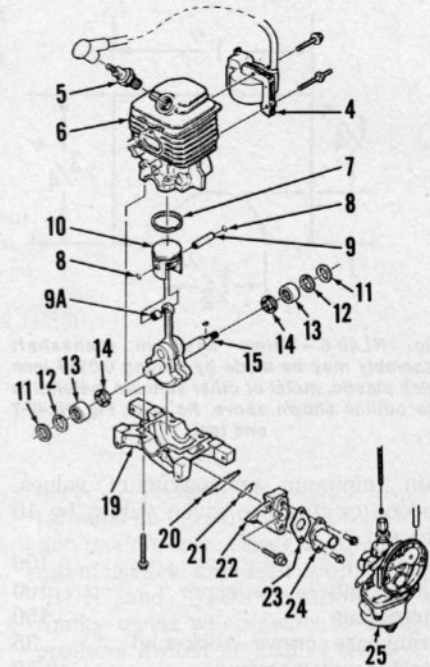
Typical exploded view of engine used on Model HB-280, HB-480 and HB-680 Blowers and Sprayers. Bearing (9A) is only used on later models HB-480 and HB-680.
